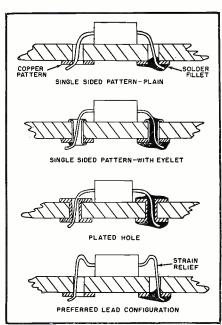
With most printed-wiring boards, the circuit is plated on one side, the components are placed on the other. The various methods of connecting the components to the wiring are shown here.
